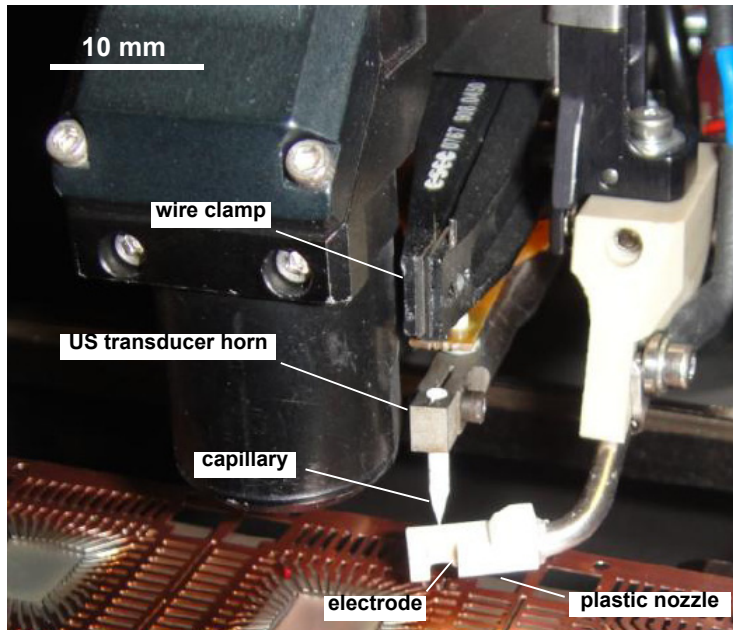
Besi Esec 3100 thermosonic wire bonder bondhead.
